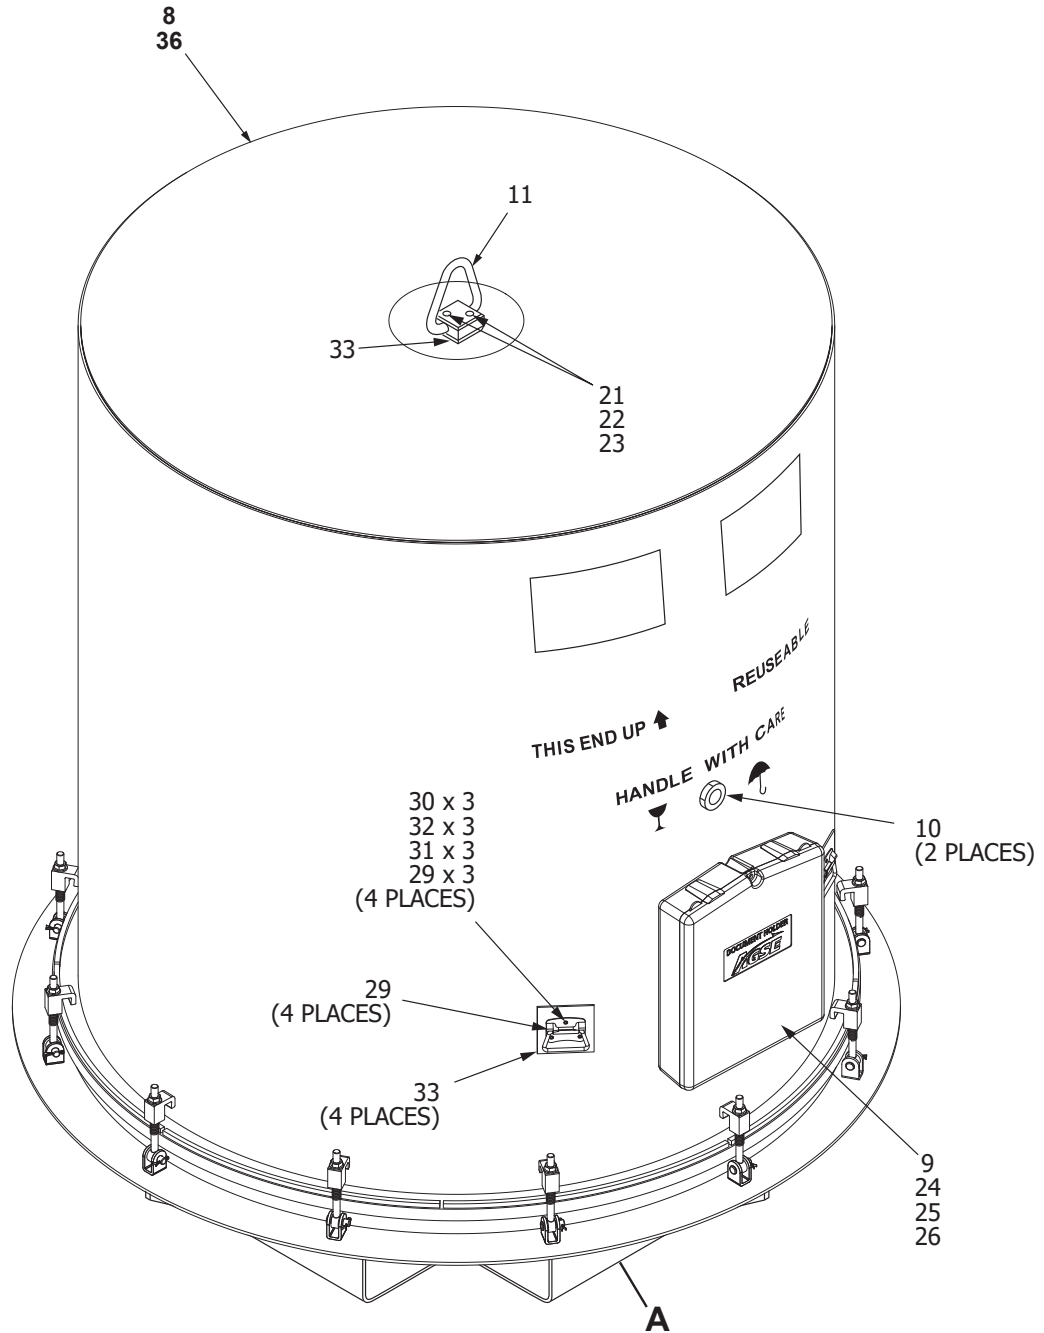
AGSE-C034 Core Engine Shipping Container
